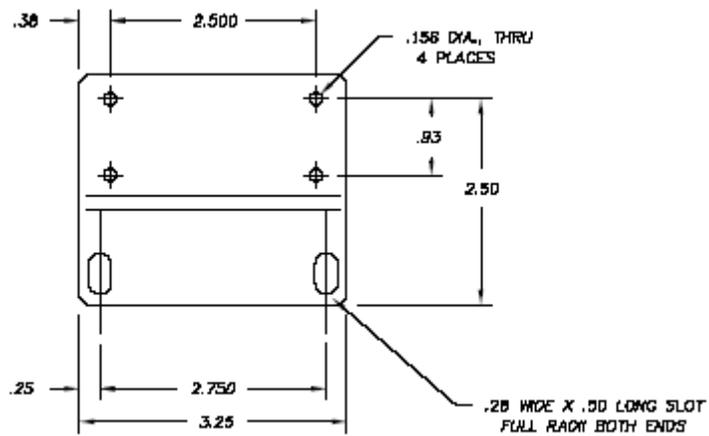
Mounting Bracket (Can be used with Access Point or Packaged Radio Module)
